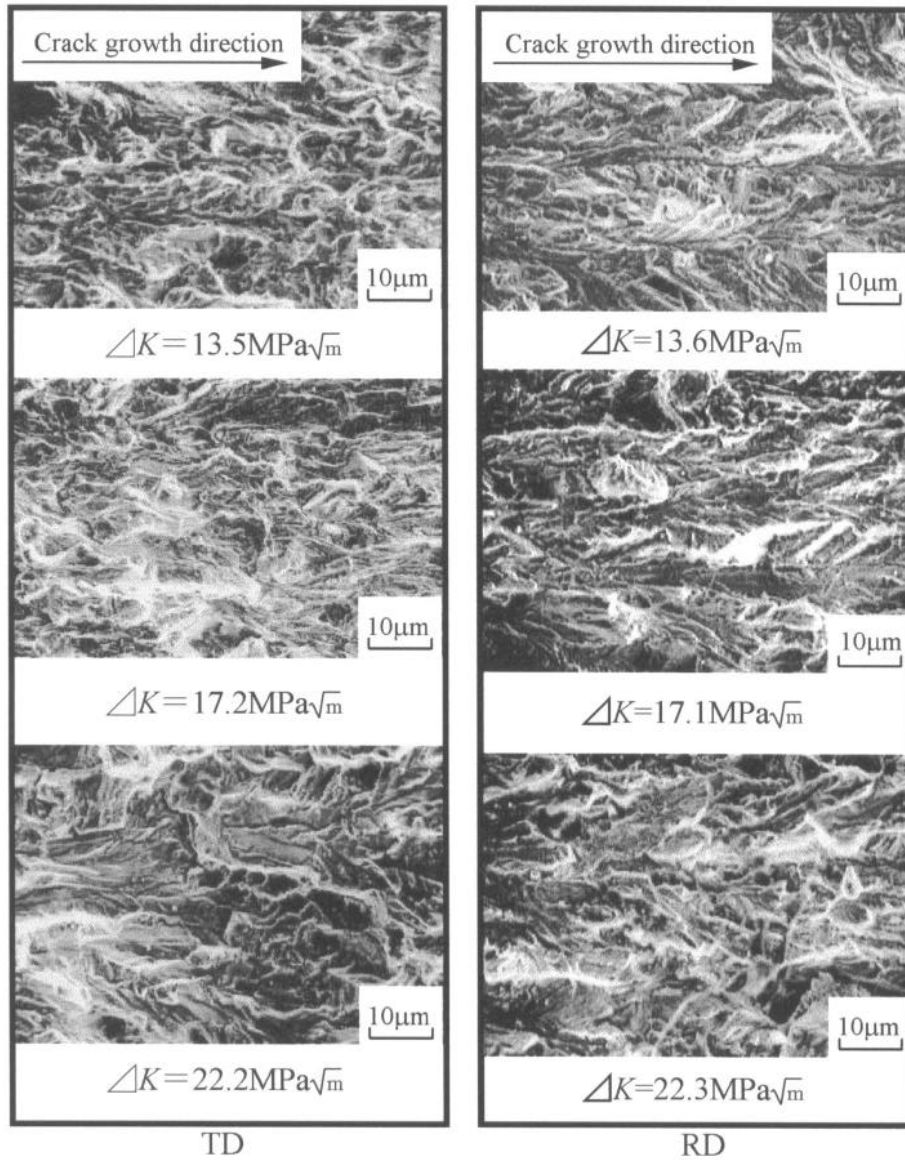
Fractographs fatigue fracture surface of test material.
